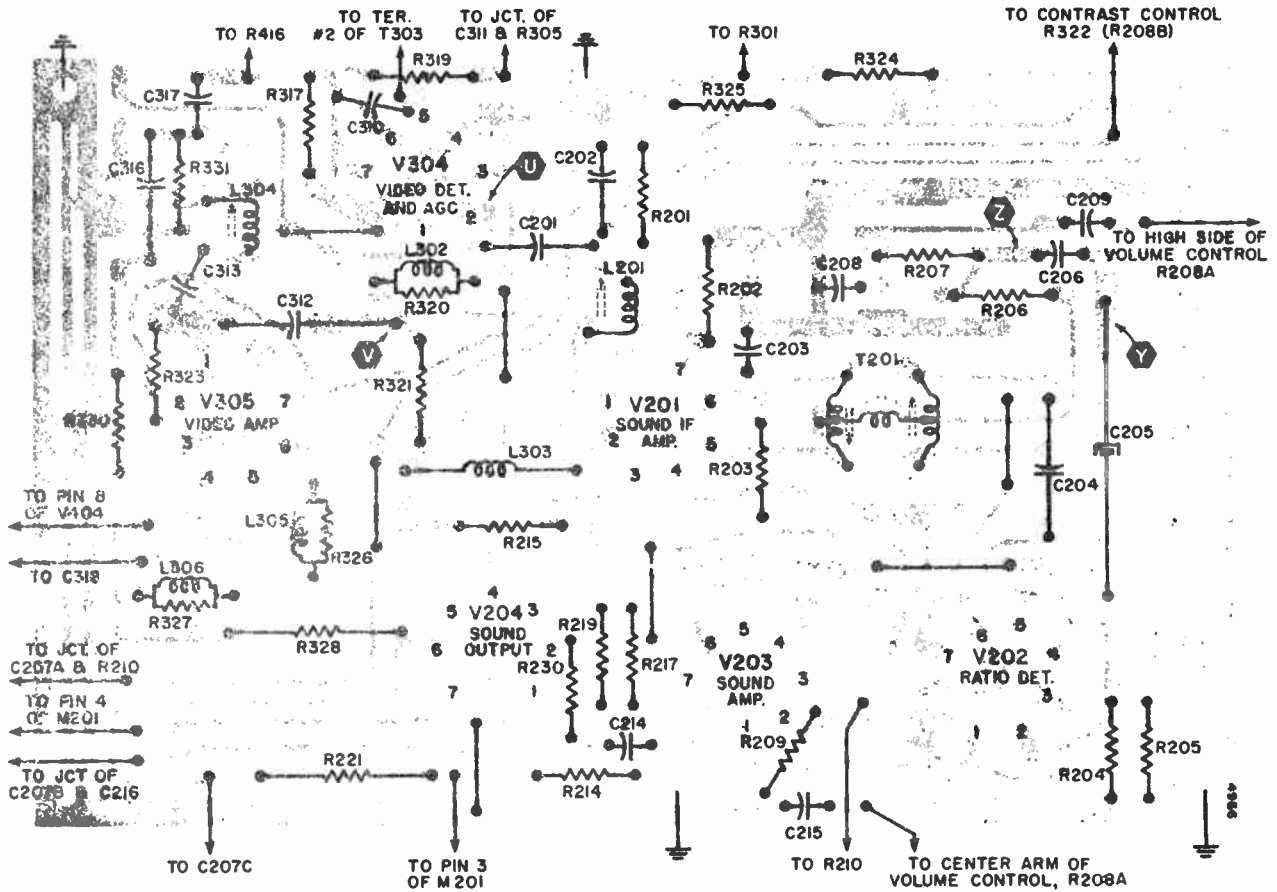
Top View of Printed Circuit Assembly (Used in Chassis Stamped Run 8 or Lower) Showing Printed Circuit and Electrical Connections.
